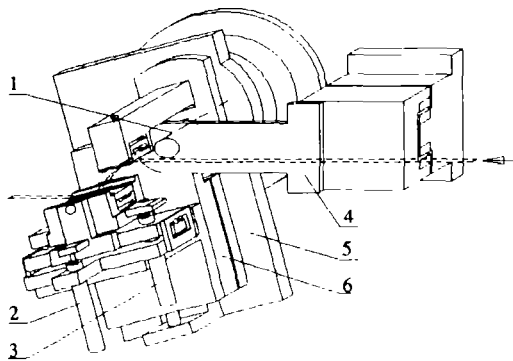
L-mould linkage mechanism: (1) Bragg rotation axis; (2) micro-driver for rolling adjust; (3) micro-driver for incident adjust; (4) pivot-rod + slide; (5) rotation table; (6)  $Y_2$ -slide of second crystal
